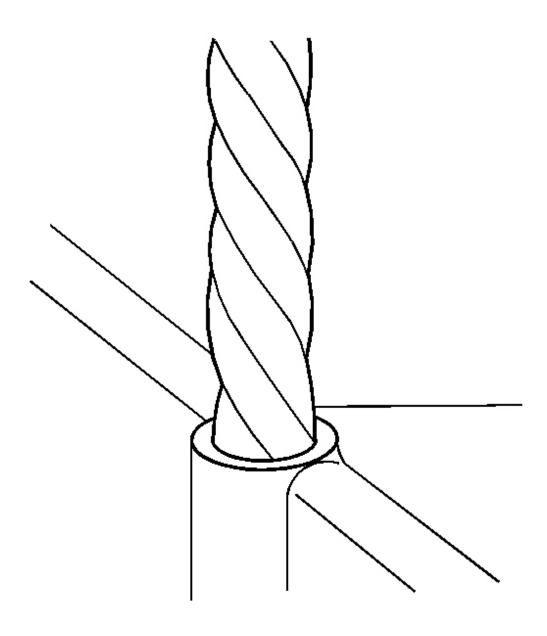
Drilling Out Threads Of Damaged Hole Courtesy of GENERAL MOTORS CORP.
